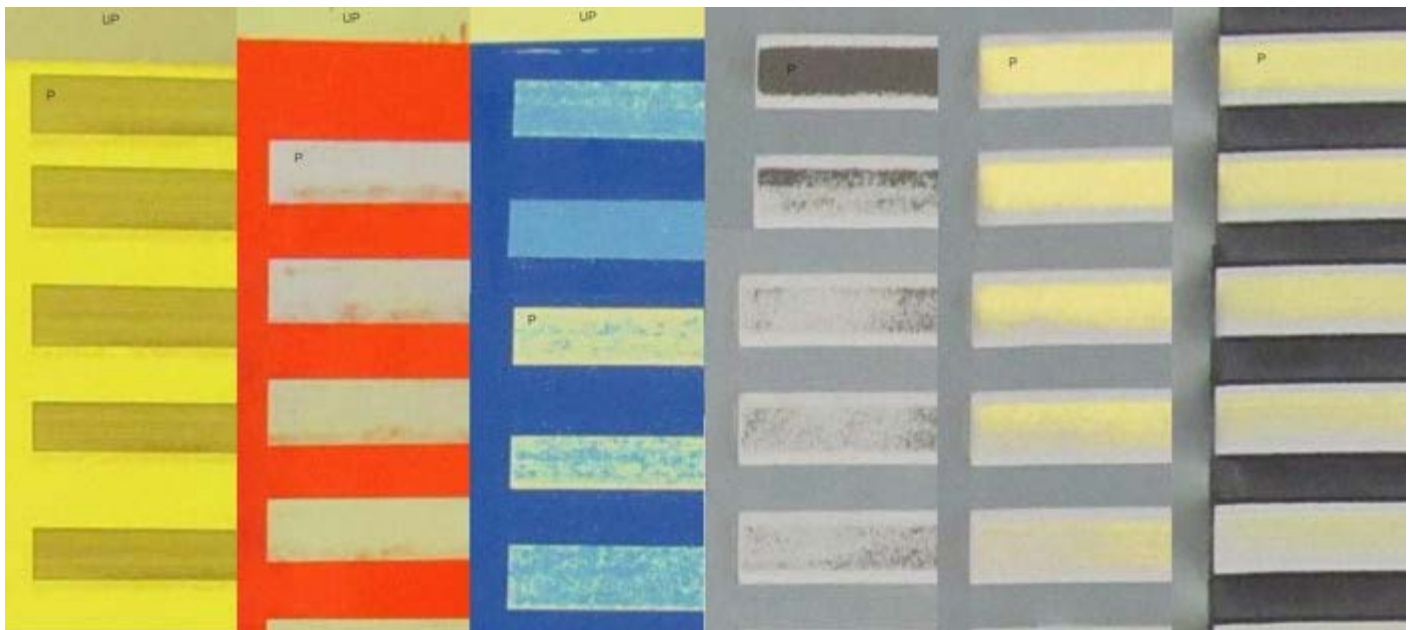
Test panels processed using a prototype laser coating removal scanner.
